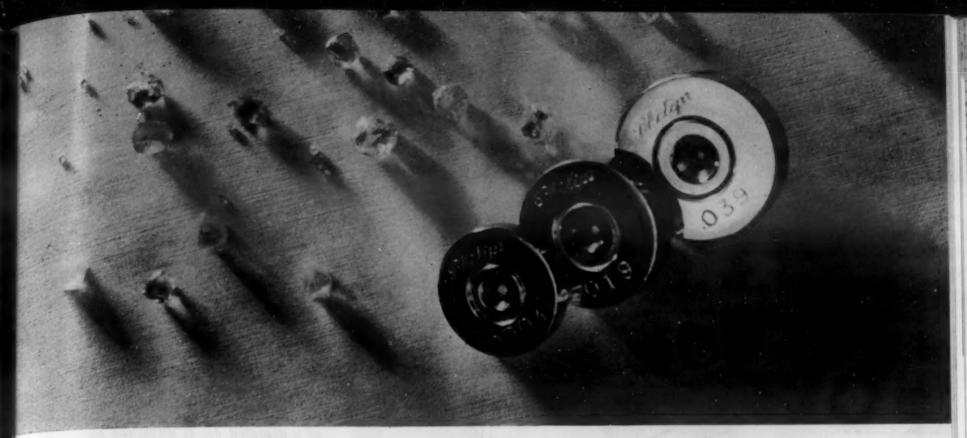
A group of diamond wire drawing dies of varying sizes and undrilled diamonds which will be drilled to produce other dies. Precision requirements can be realized by studying the minute diamonds used.
